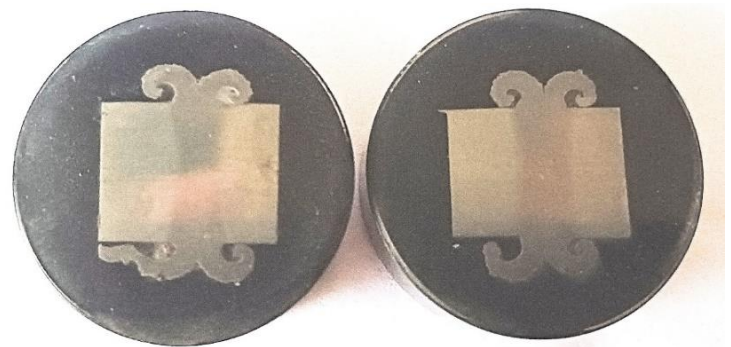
Cross section of RFW joints JIS S45C, as-weld (left side); stress relieving (right side)
